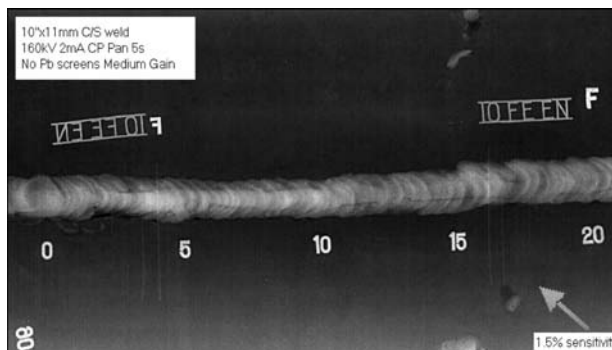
CR image of a weld with a longitudinal defect
